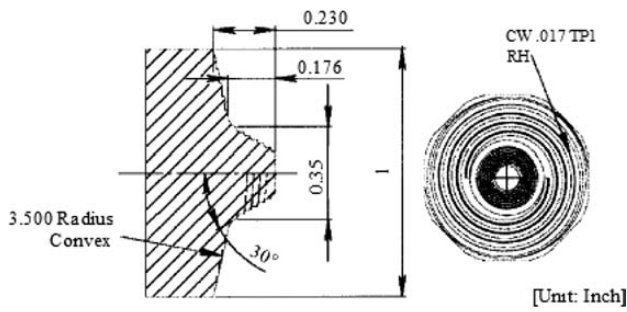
Geometry of the CS4 tool used in the welding^{10,11}
